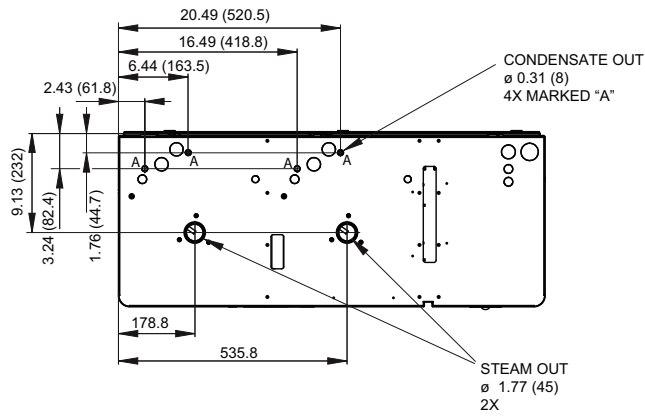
Unit dimensions unit "Medium"- dimensions in Inch (mm)
